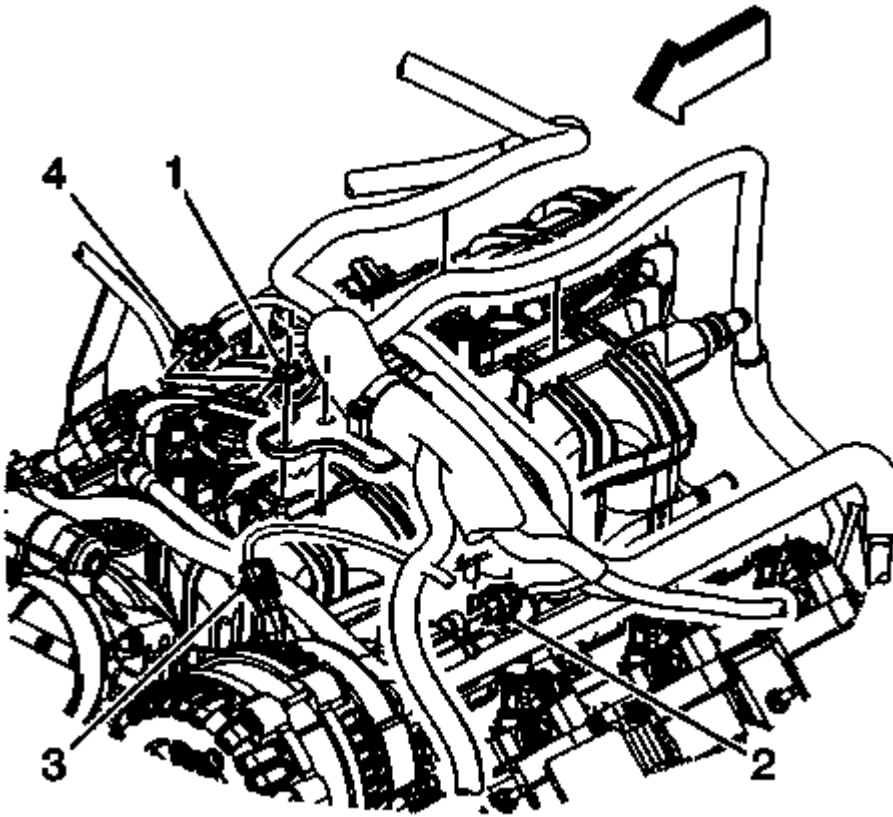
View Of CPA Retainer, Engine Harness Electrical Connectors & Harness Clips
